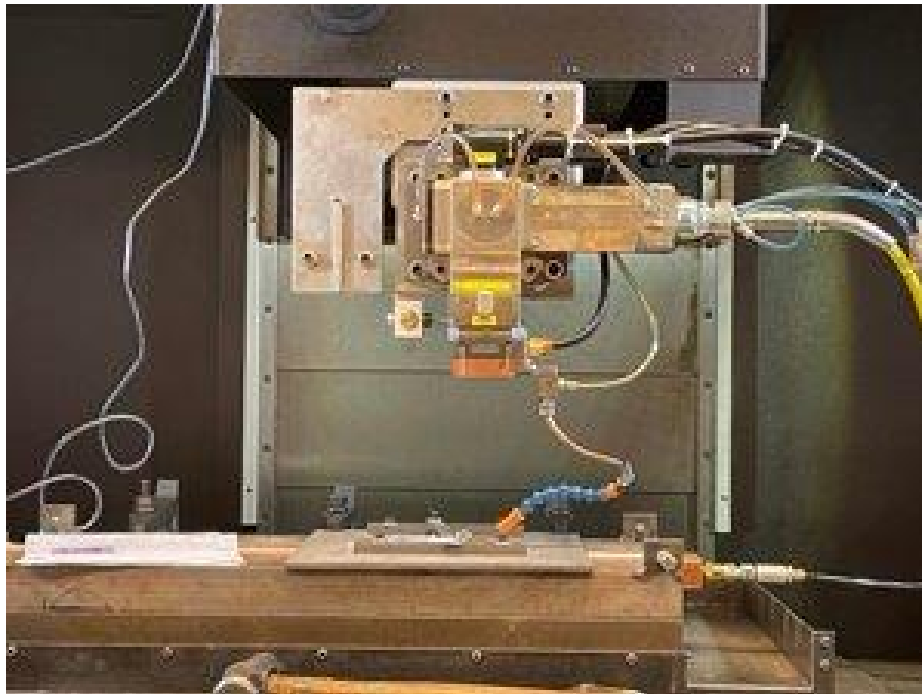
YLS-1000-C model laser welding machine
